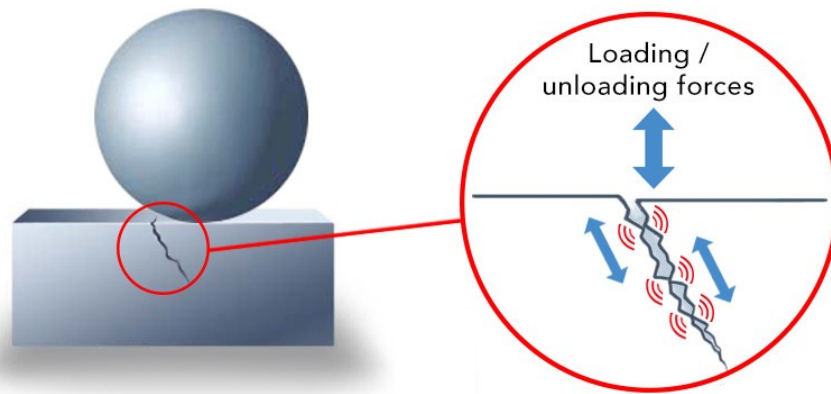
Typical early bearing failure behavior in Stages 1 and 2 for a crack in which microscopic parts rub against each other. When the bearing passes a crack, the loading and unloading forces create friction between microscopic metal parts, which in turn emits elastic waves. This process causes the crack to grow.
